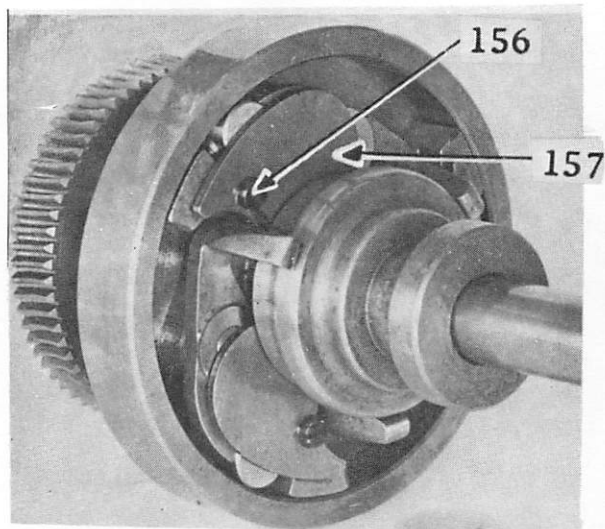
Rapid Feed Clutch Showing Position of Sleeve when Clutch is Disengaged
